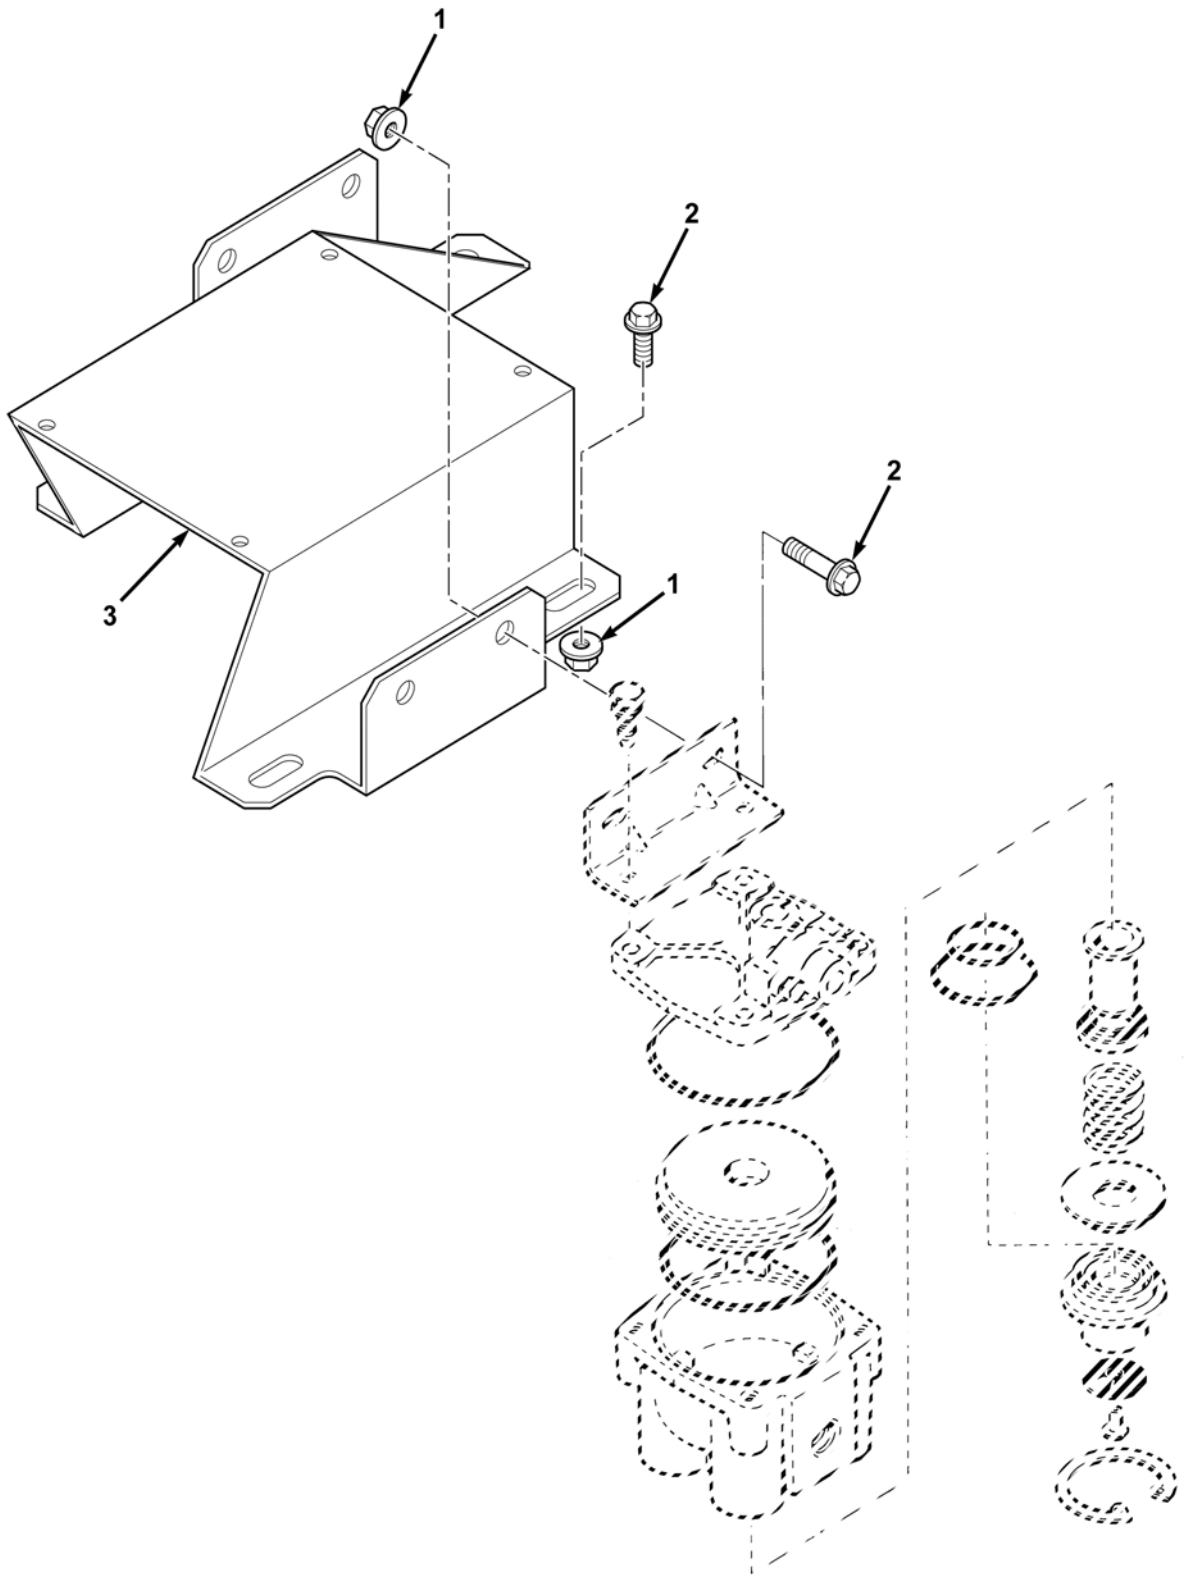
CHASSIS AIR-RELAY VALVE 3171964
